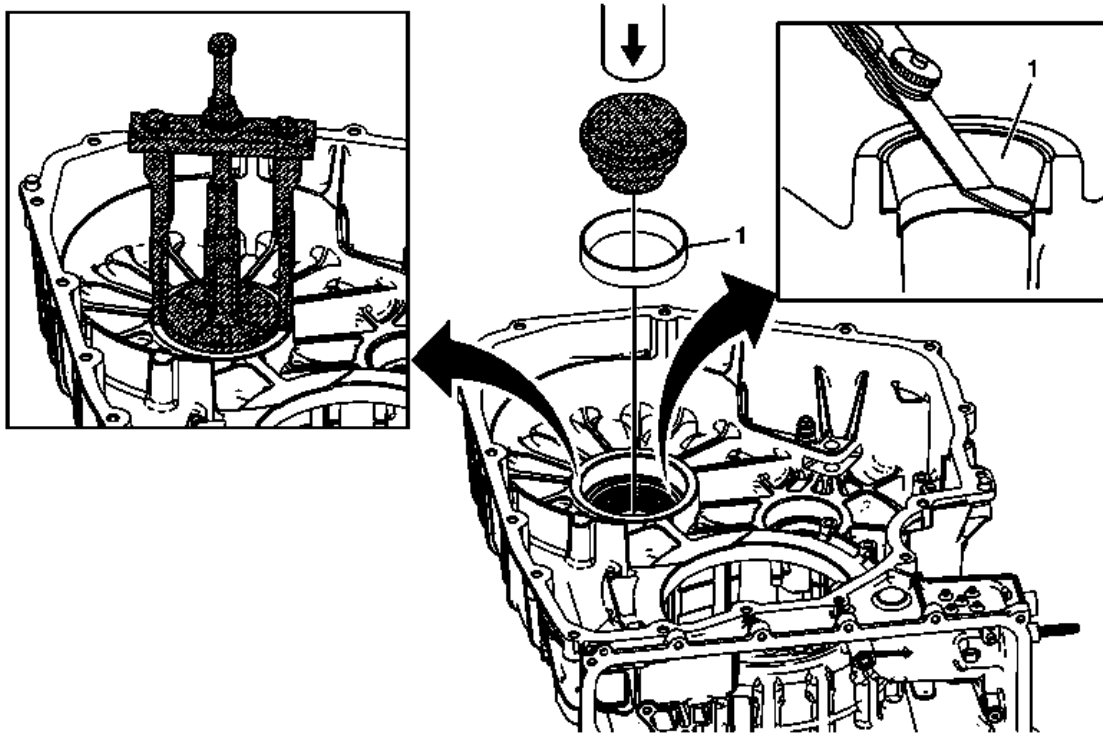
Front Differential Carrier Bearing Cup - Case Side
